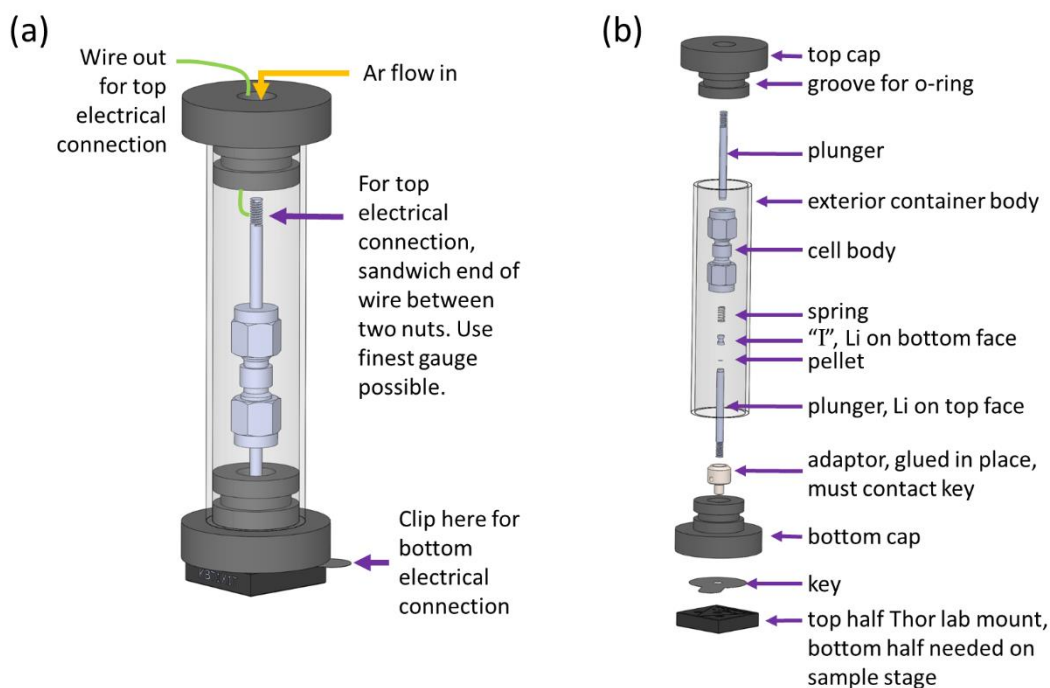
Operando custom tomography cell. (a) The assembled cell and (b) the exploded view.
